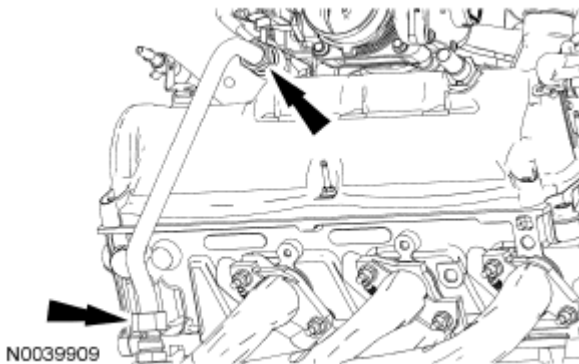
Locating Exhaust Manifold-To-Exhaust Gas Recirculation System Module Tube
